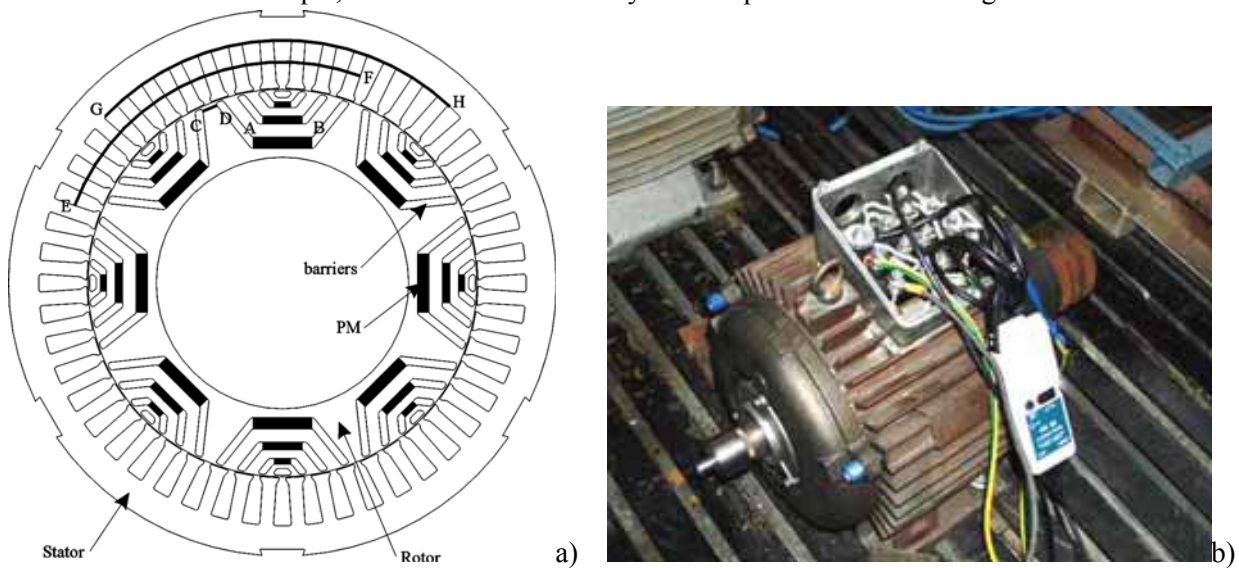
PM-RSM machine: a) core cross section [Bol 04a], b) the prototype on the test rig [Pit 04].
